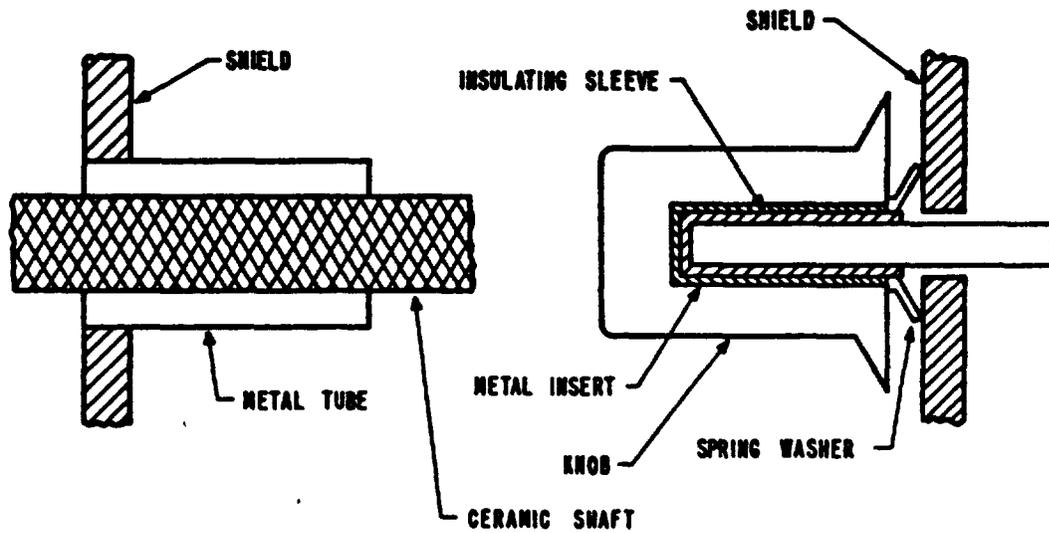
SHAFT FEEDTHROUGH TECHNIQUES
